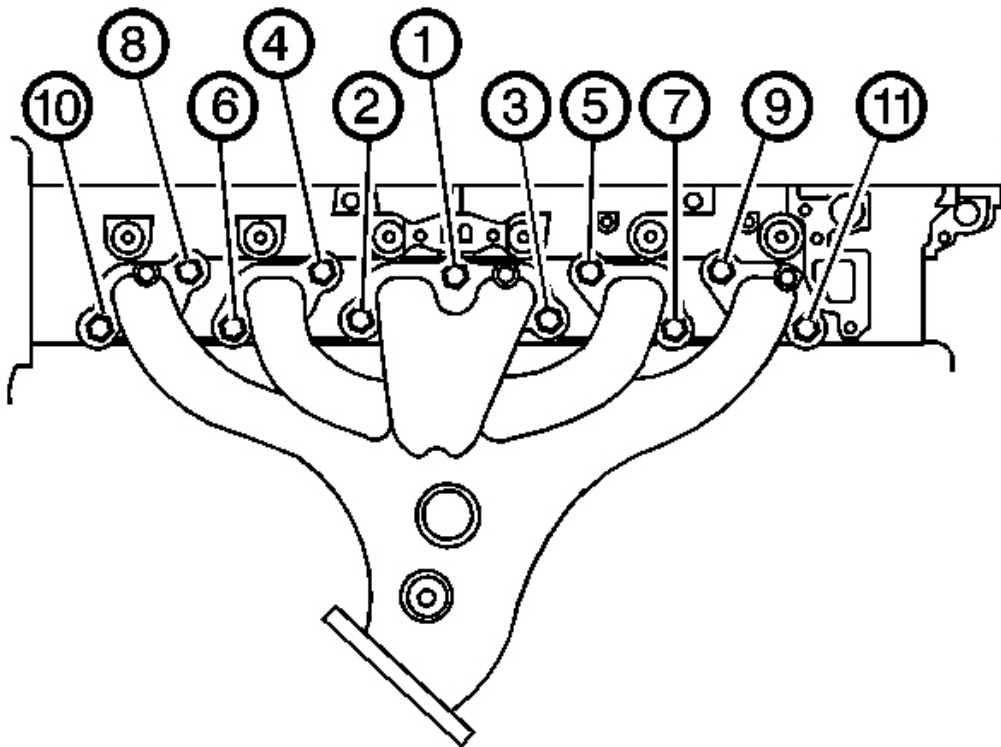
Installing Exhaust Manifold Bolts - 4.2L
